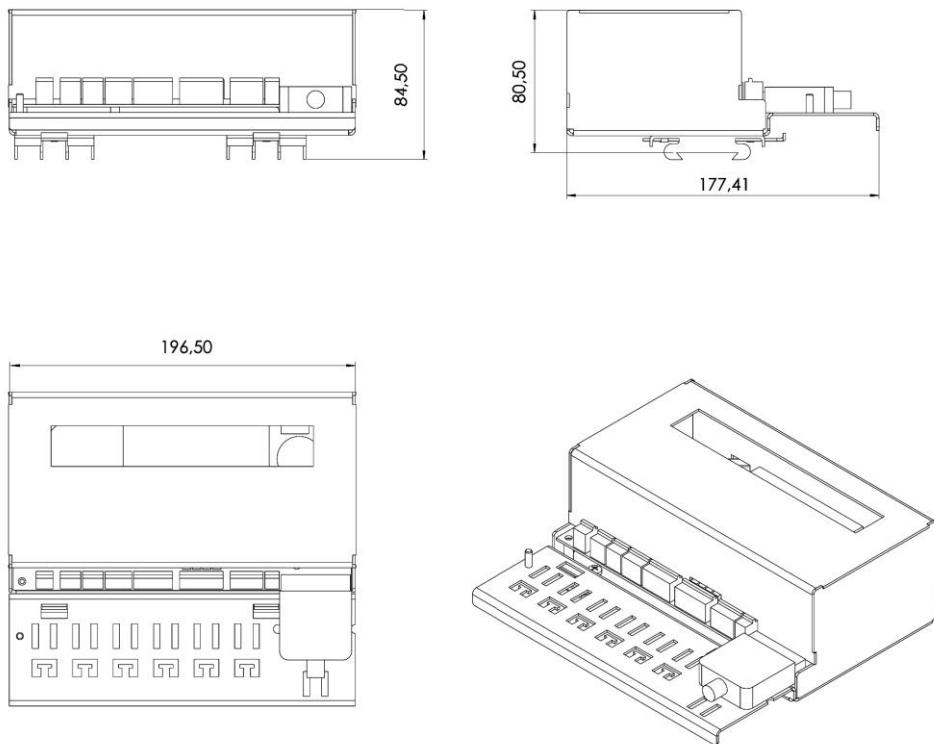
The dimensions of the WA-802r top-hat rail mounting dimensions.
